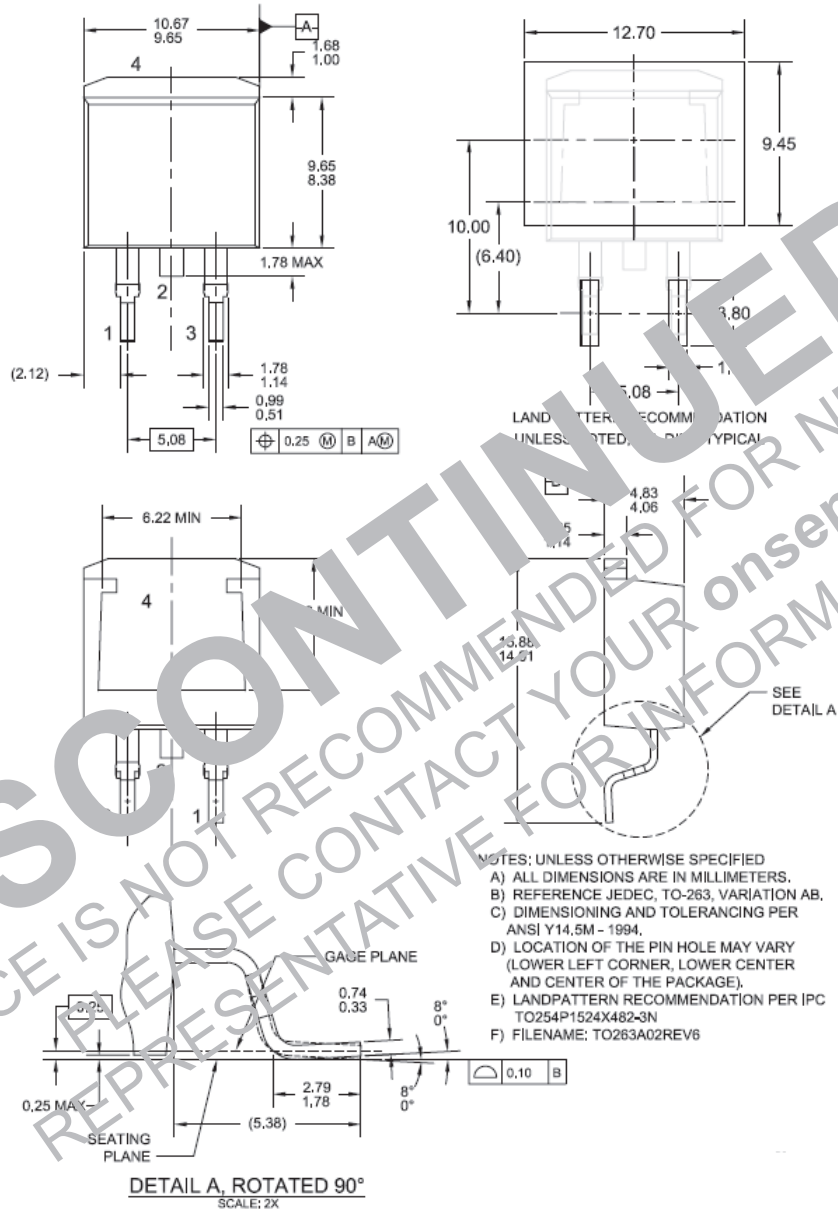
TO263 (D<sup>2</sup>PAK), Molded, 2-Lead, Surface Mount
